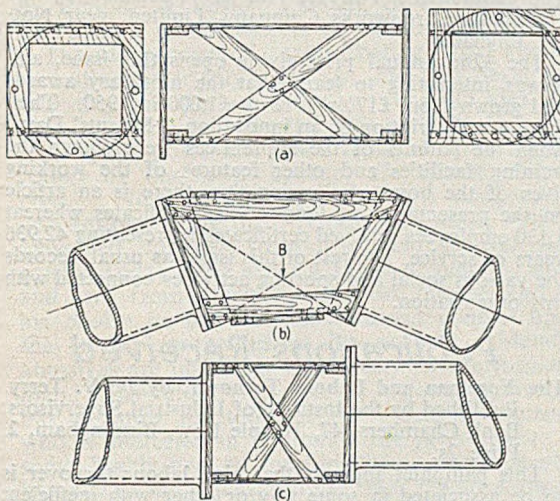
Three Views of a Template made for Casting a Pipe Connecting Piece.
